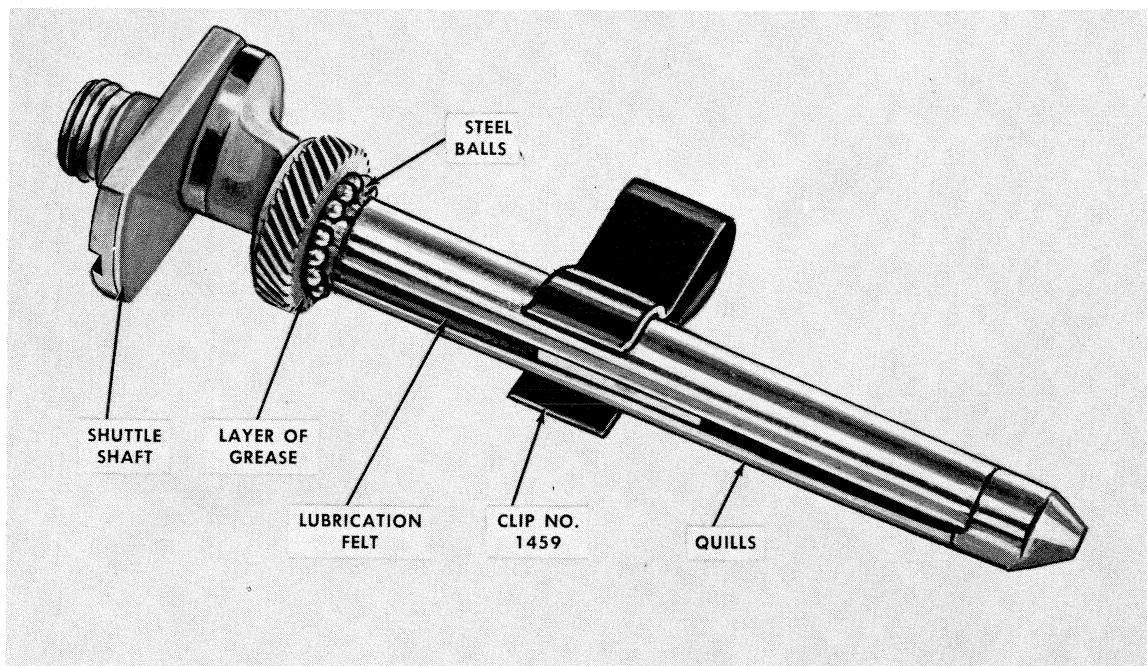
Reassembly of Counter Gear and Shuttle Shaft
